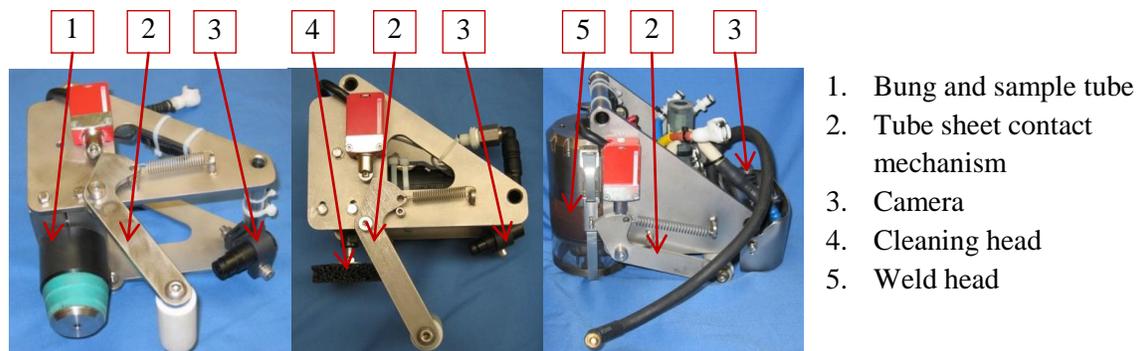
(left) CO₂ Sample Tool Head; (centre) Cleaning Tool Head; (right) Welding Tool Head
